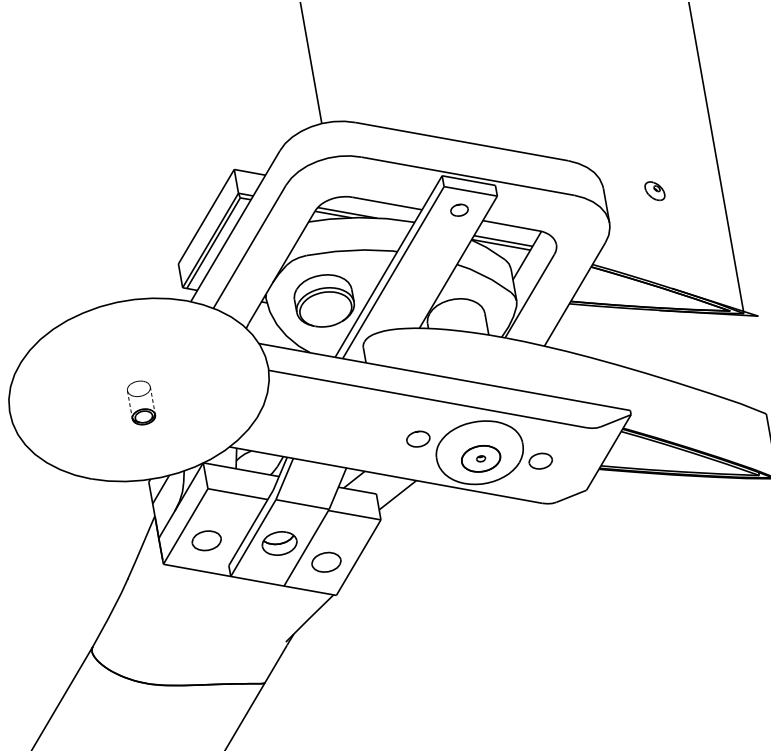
Pro/ENGINEER representation of the Type A geometry component in place on the prototype turbine.
